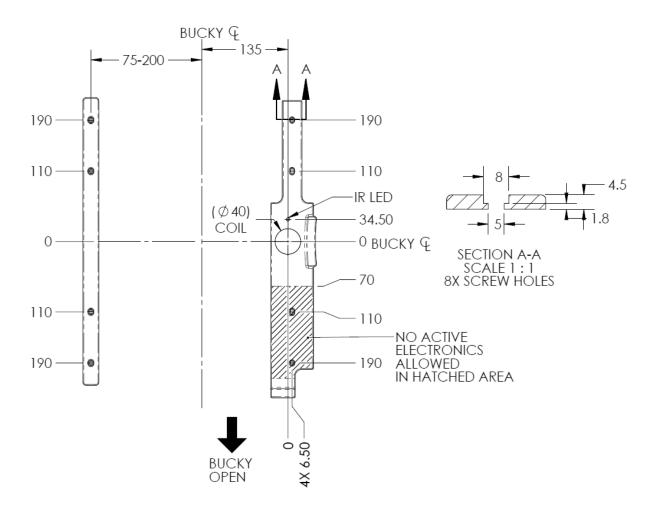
Varex Inductive Battery Charger Dimensions (in mm) and Mounting Hole Locations (4343W and 4336W-G5 and 2530W-G5)
